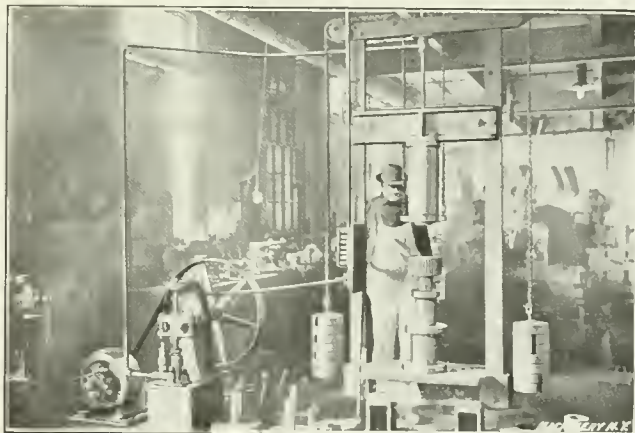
Building up Core under a Hydraulic Press, showing Pump and Connections
